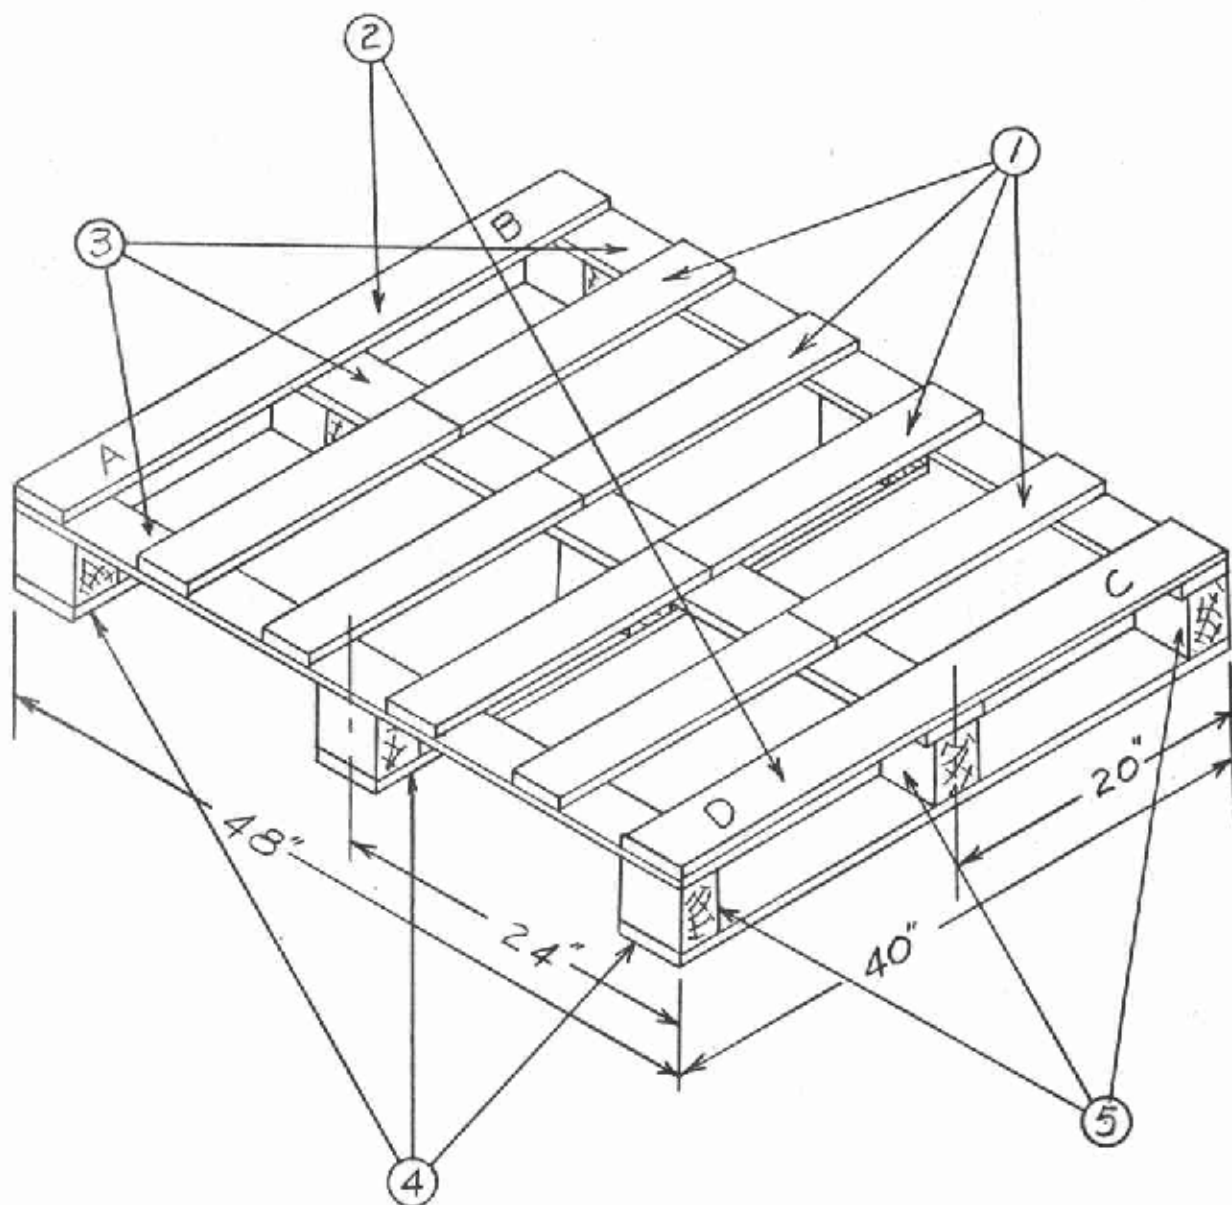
Component parts of four-way entry pallet: (1) intermediate deck boards; (2) end deck boards; (3) subdeck boards; (4) bottom deck boards; and (5) posts. Two clinched common nails per joint were used on the subdeck boards; two annular-grooved nails per joint were used to fasten top deck to posts.
